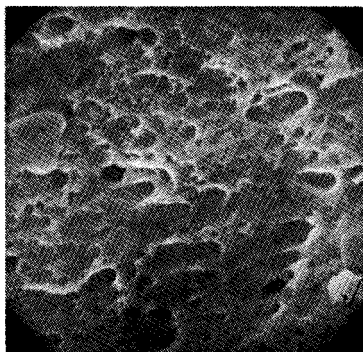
Elongated shear dimples typical of torsional overload seen on the fracture surface of the failed link.
